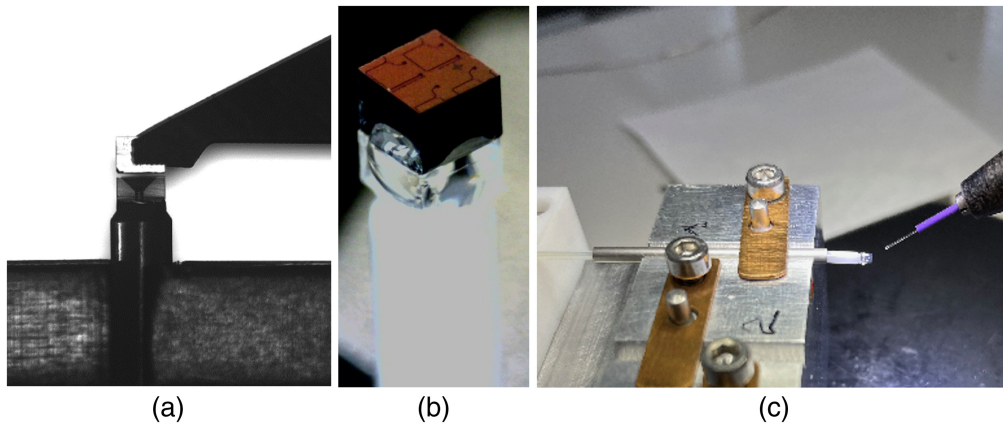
(a) Assembling the PIC on top of the holder (side view). (b) View on the assembly after gluing the PIC to the holder. (c) Glue dispensing for the sensor encapsulation based on a metal tube.
